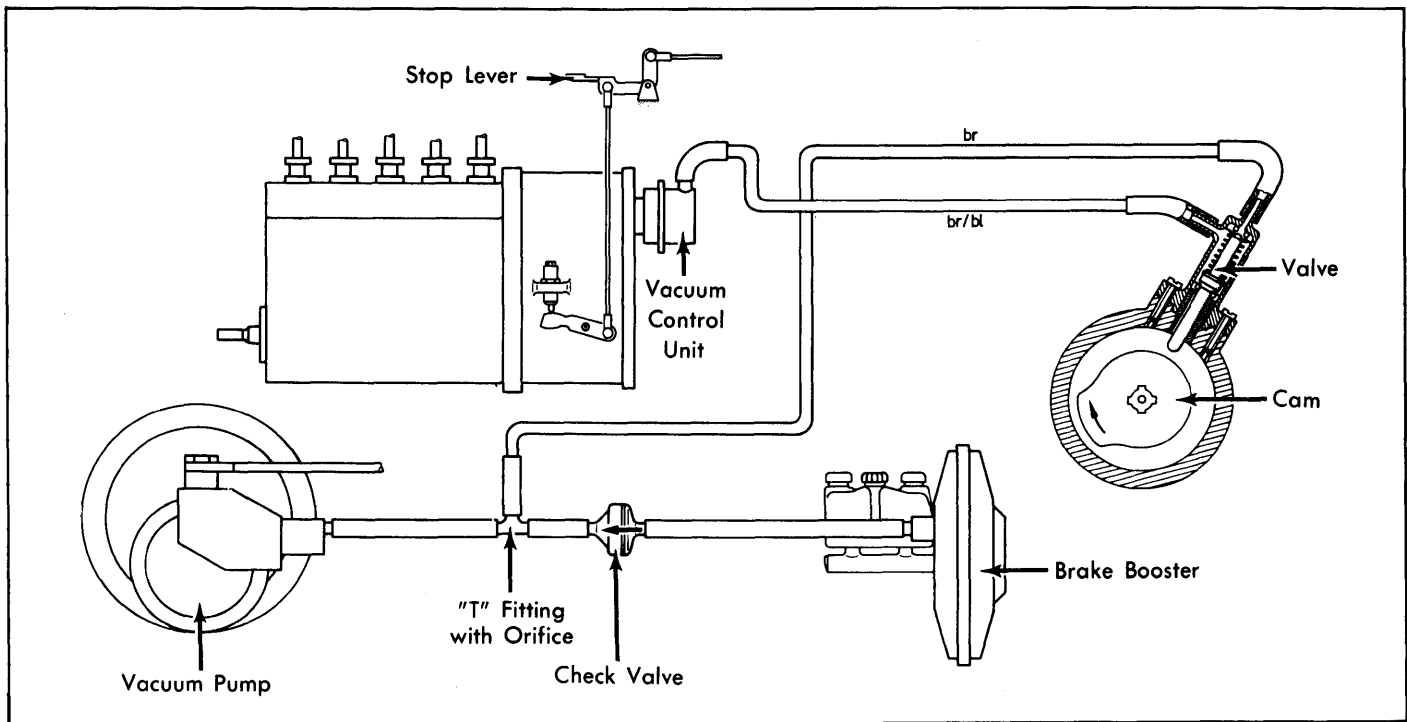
Vacuum Diagram Showing Vacuum Pump, Valve, & Vacuum Control Unit On Injection Pump (Typical)
